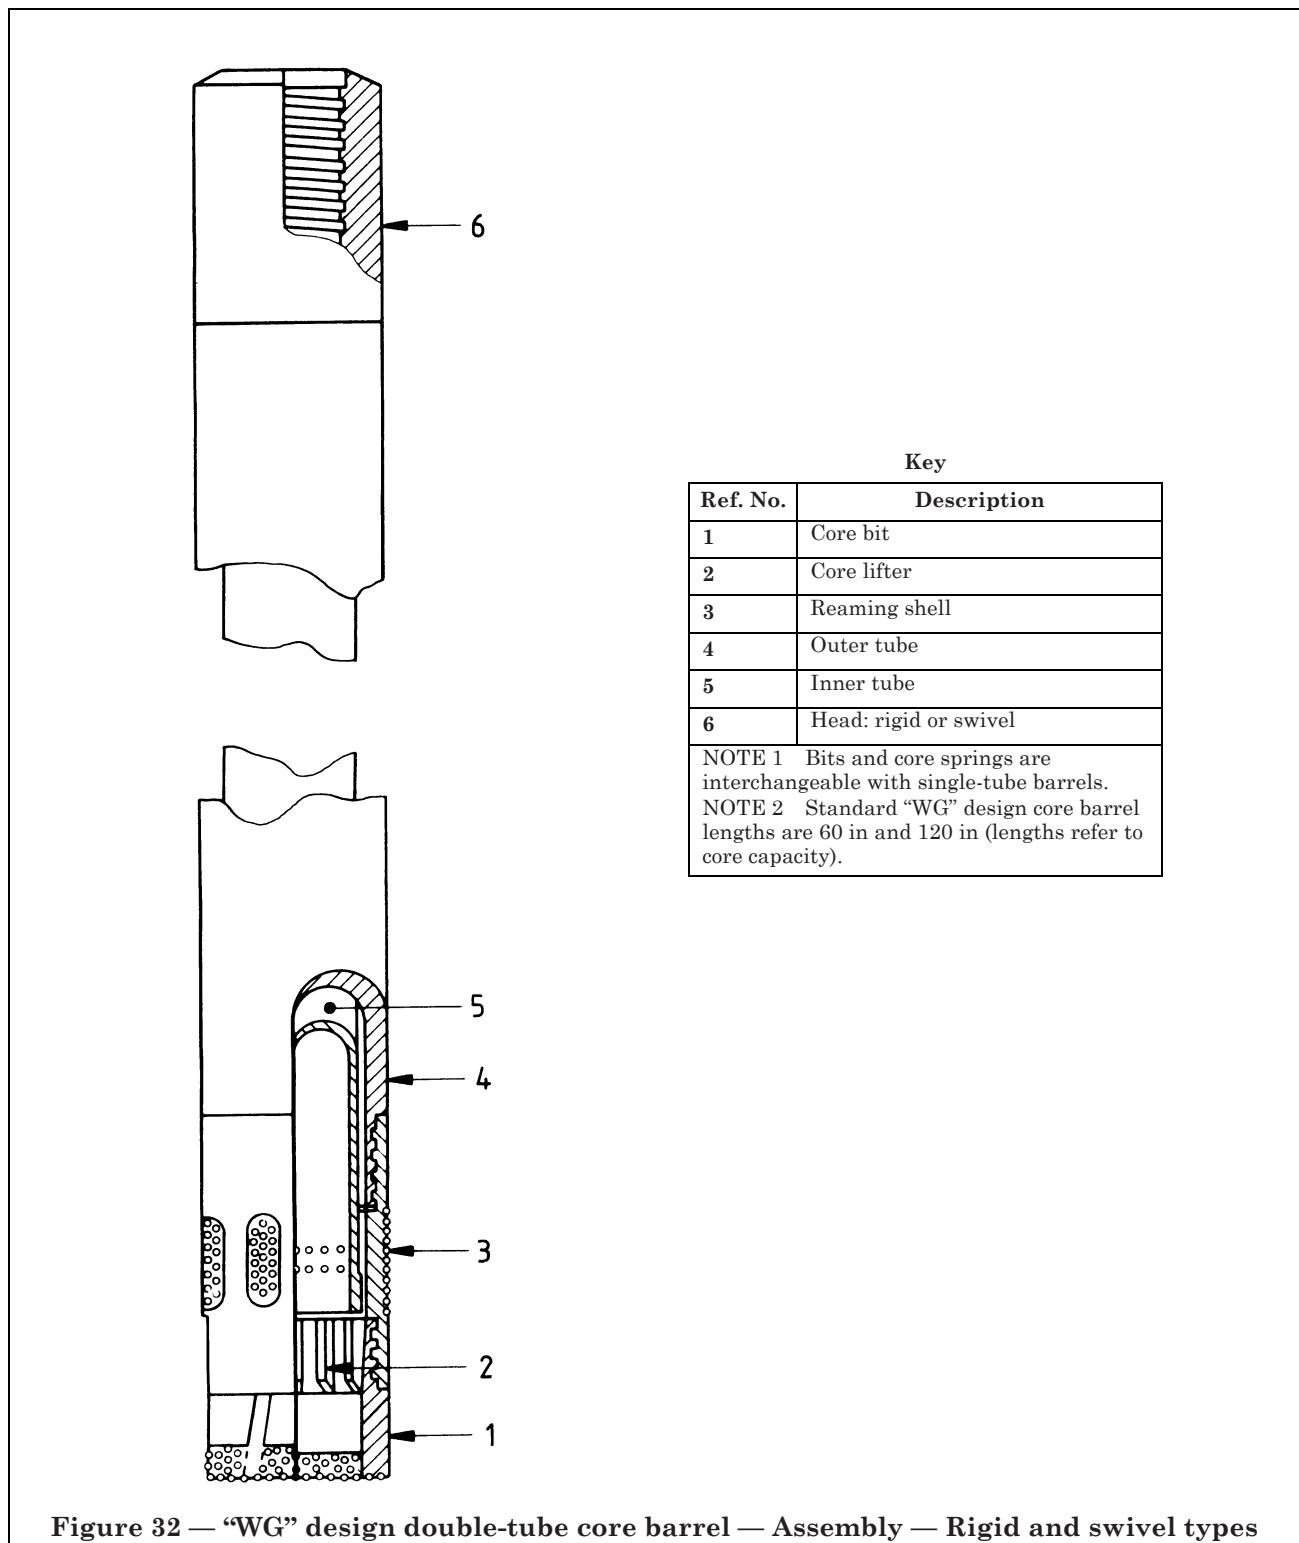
"WG" design double-tube core barrel — Assembly — Rigid and swivel types
